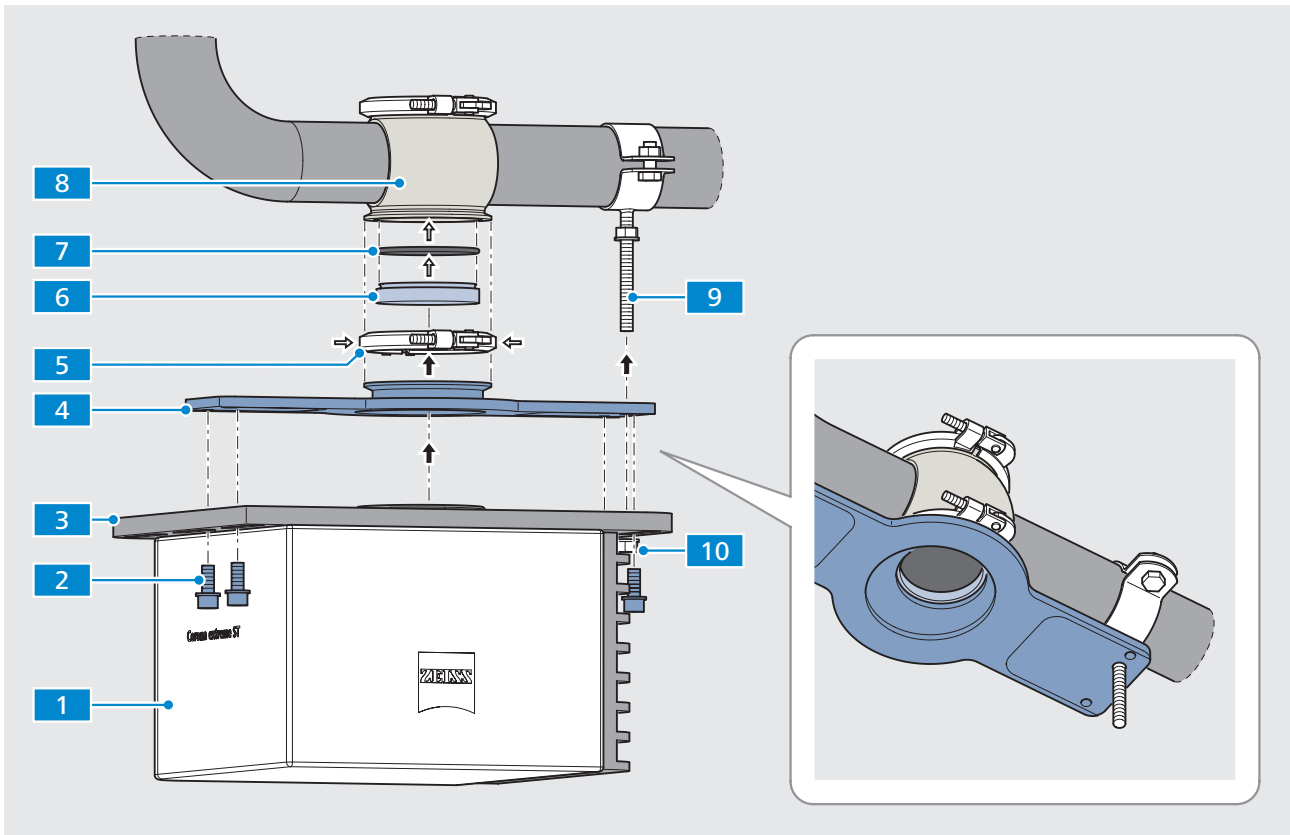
Mounting the Corona extreme with flange for GEA pipes
